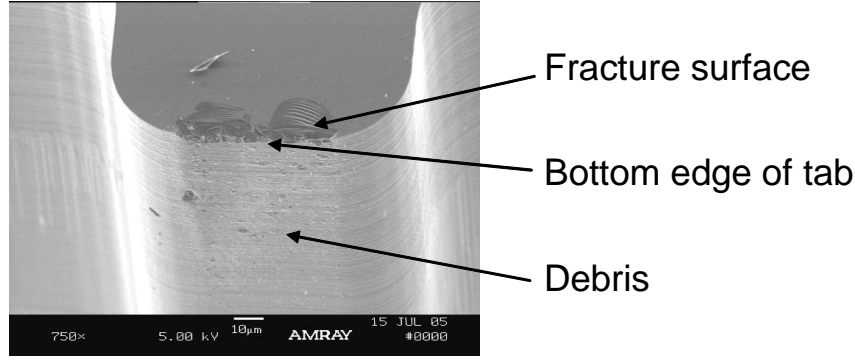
Mechanical damage including debris and outright fracture resulted from a sliding grazing angle contact of the sharp bottom edge of a tab with the frame.
